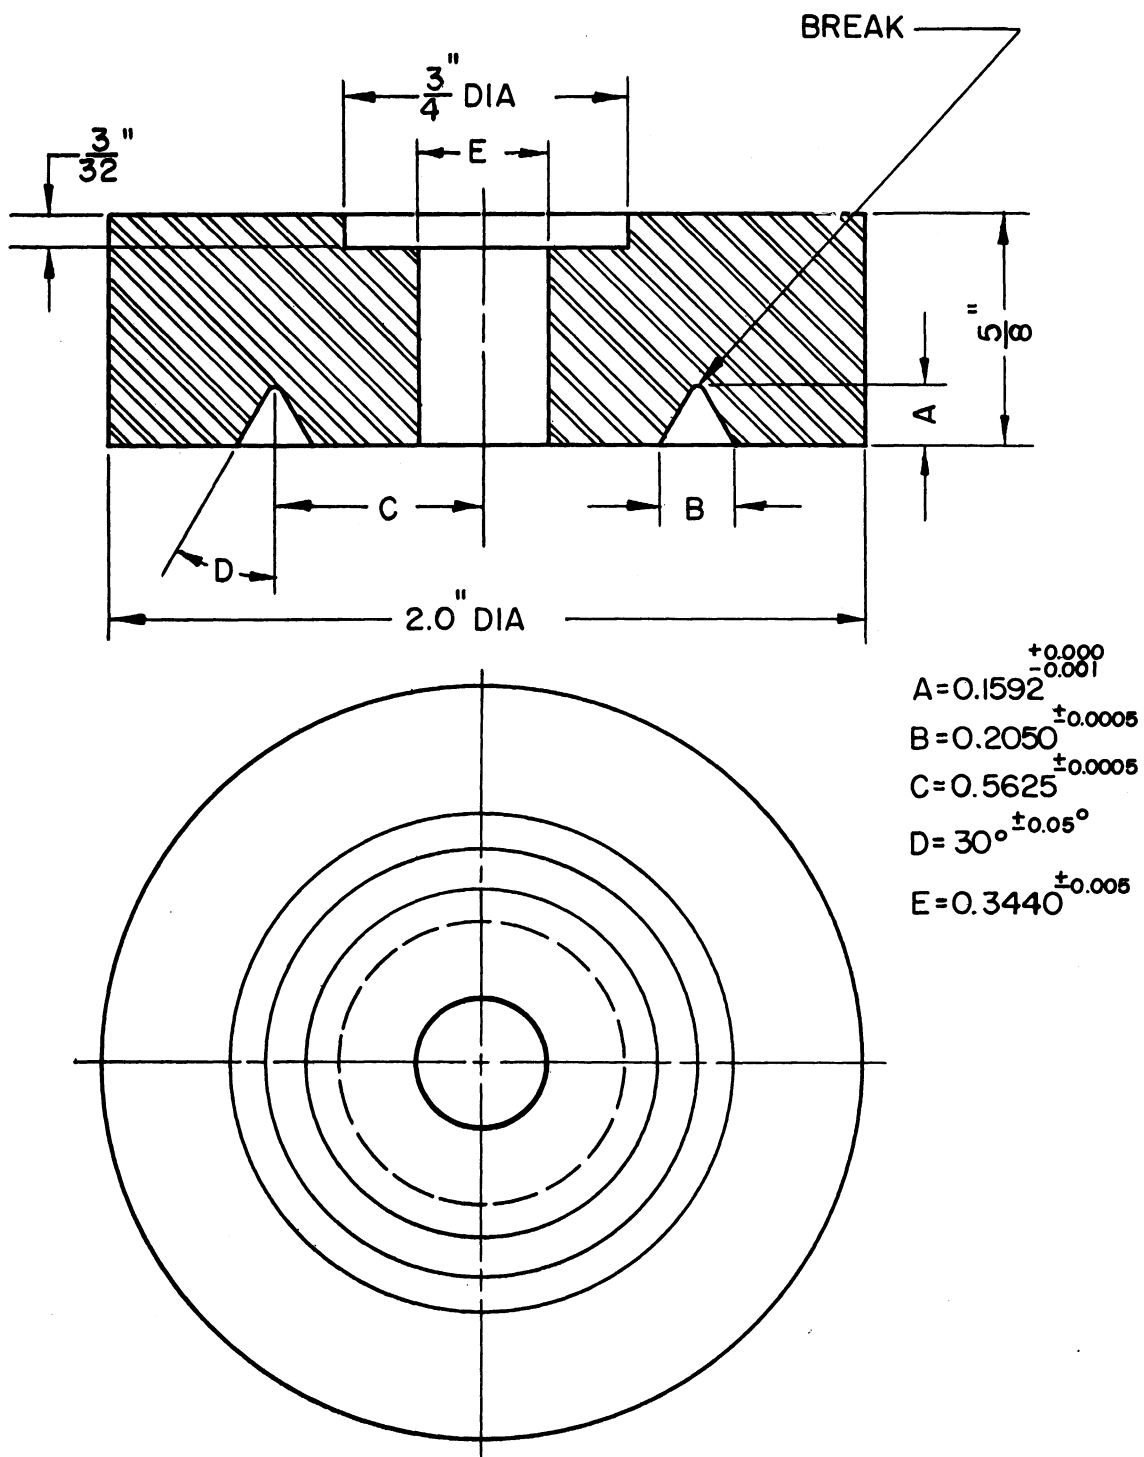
Cover detail - test jig confining O-ring, junction box.
